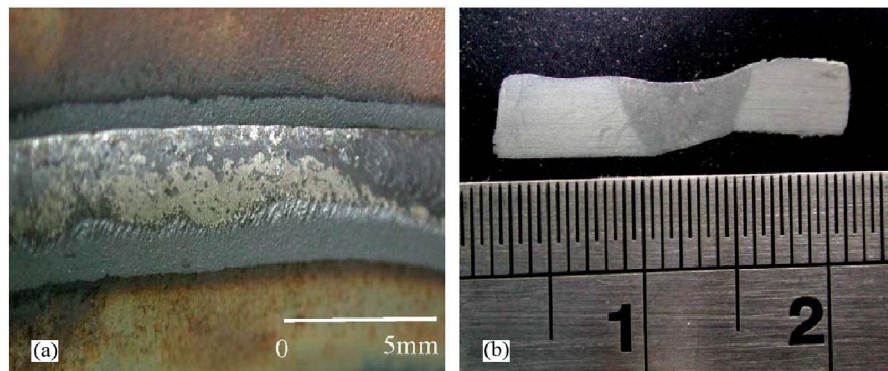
(a) Macrograph of a grooved weld at 3 O'clock location (downward). (b) Fusion zone section at 3 O'clock [9]
